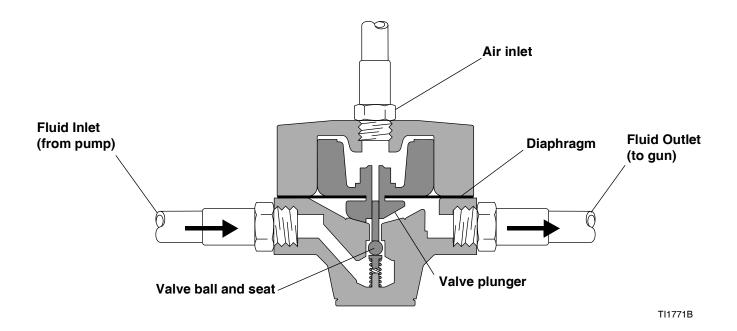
Cutaway of Pneumatic Fluid Pressure Regulator
